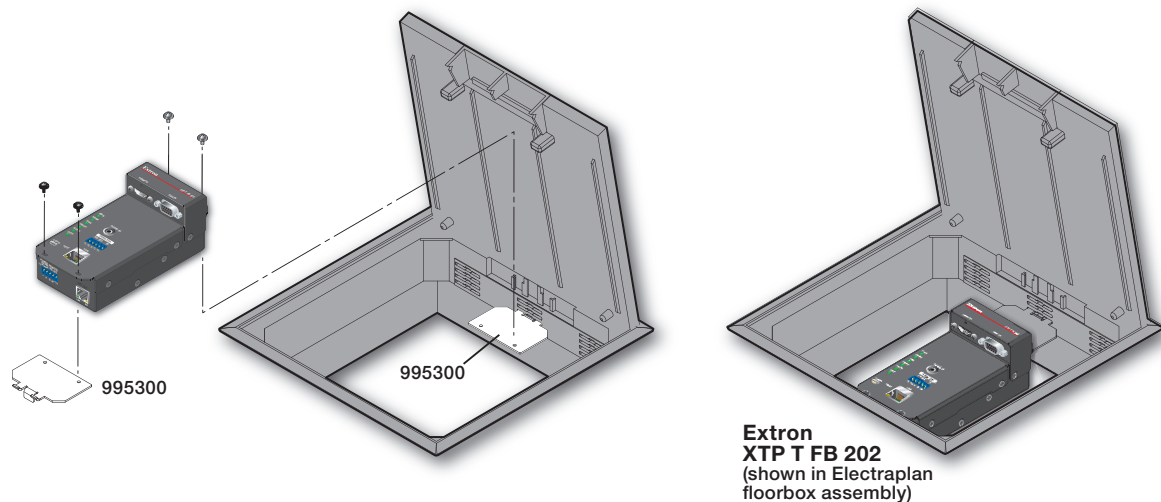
XTP T FB 202 in an Electraplan (or PUK) Floor Box
